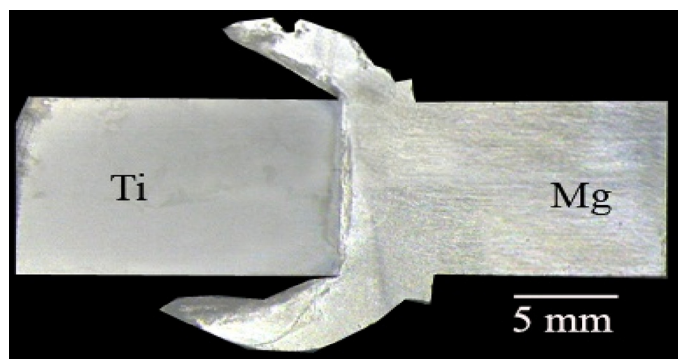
Macrostructure of friction welded Mg–Ti dissimilar joints.
